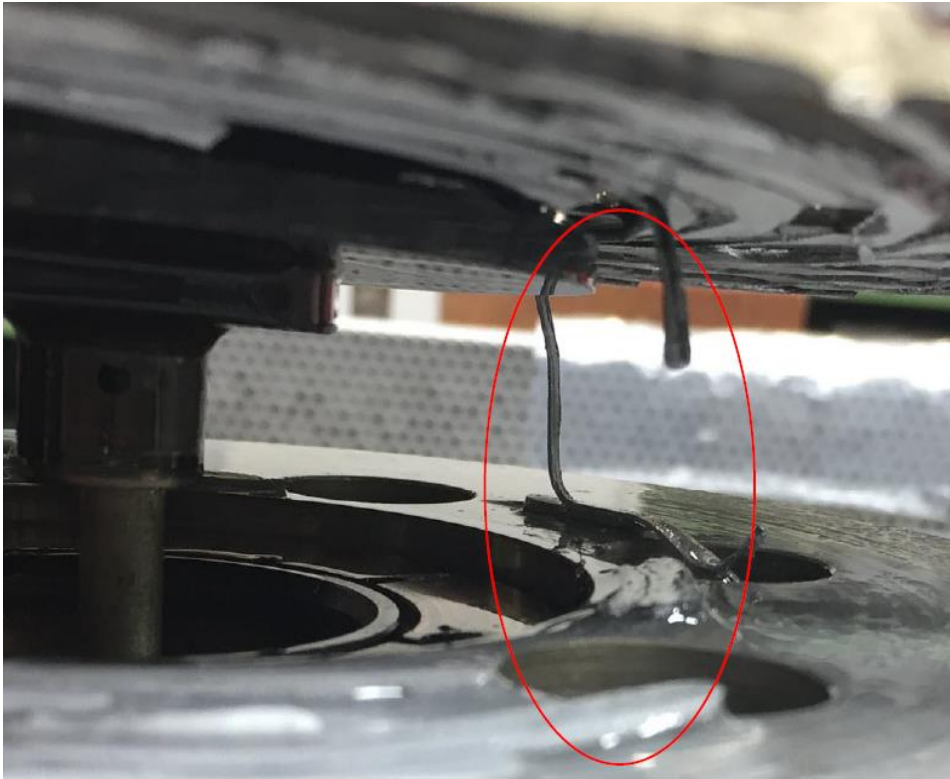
When the impeller was dismantled, there was noticeable partial welding with a pump housing wall there.
